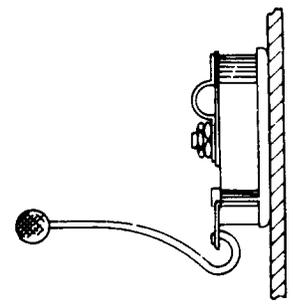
Resistors — Tube Type — Bracket Mounted — Cable Against Panel — No. 14 Gauge and Smaller Wires
